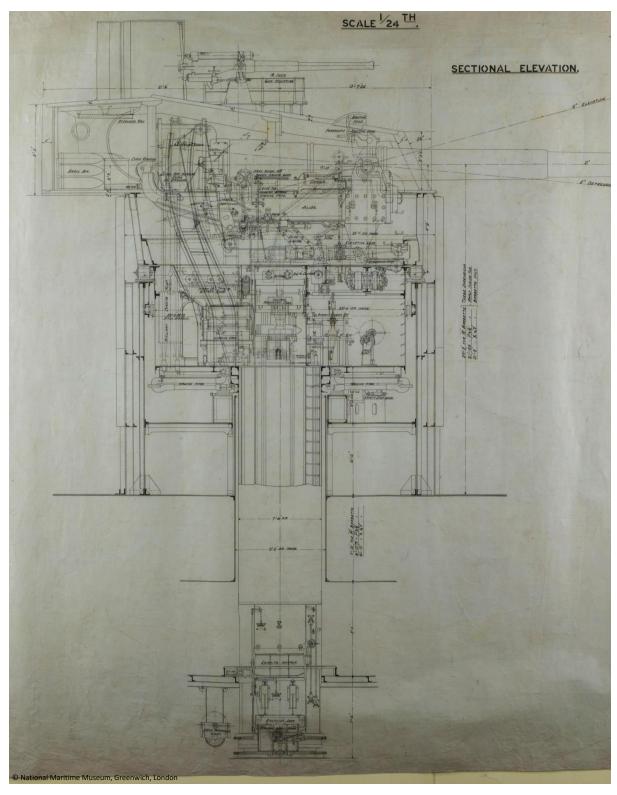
VANGUARD turret as built, the 4-inch gun on the turret roof was removed later
